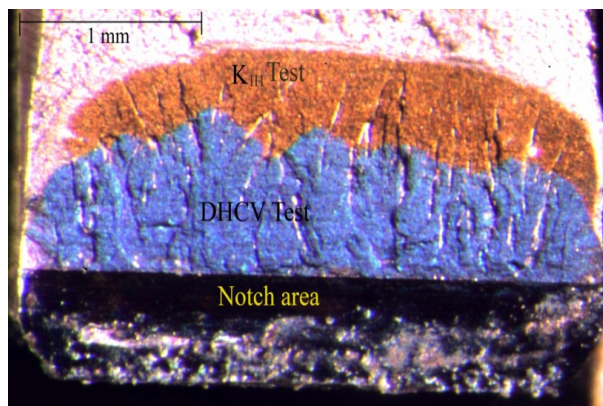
Fracture surface of CB specimen EX601-4 shows two DHC crack zones.
